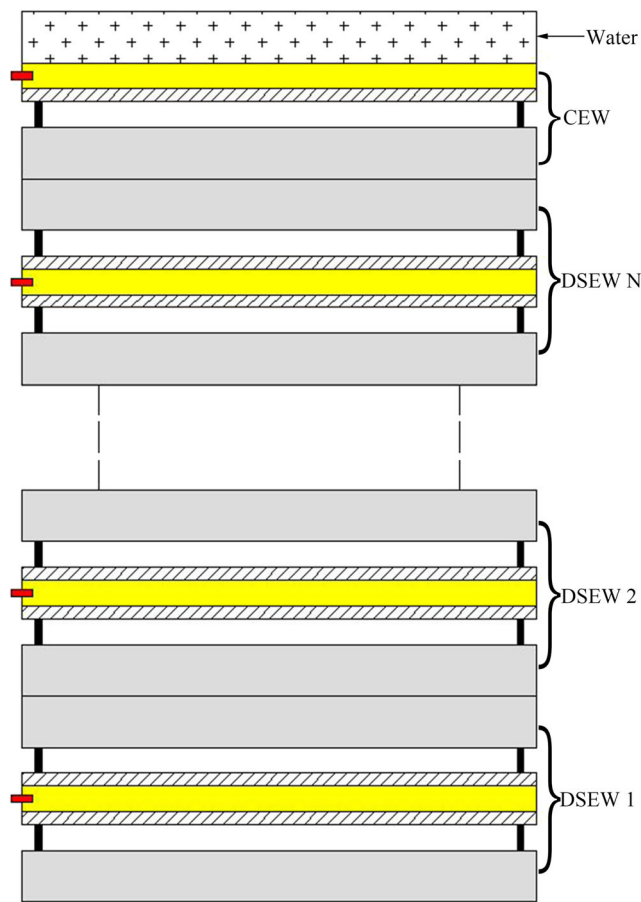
The self-restrained explosive welding (SREW) setup
